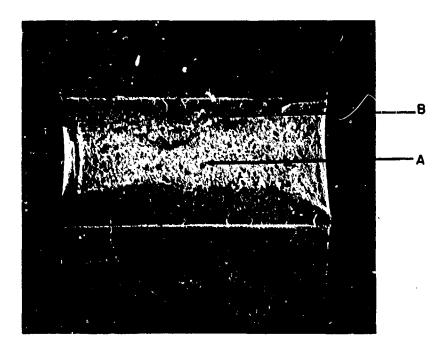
Fatigue fracture surface of a temper-embrittled A-514 weld specimen. 11x.
